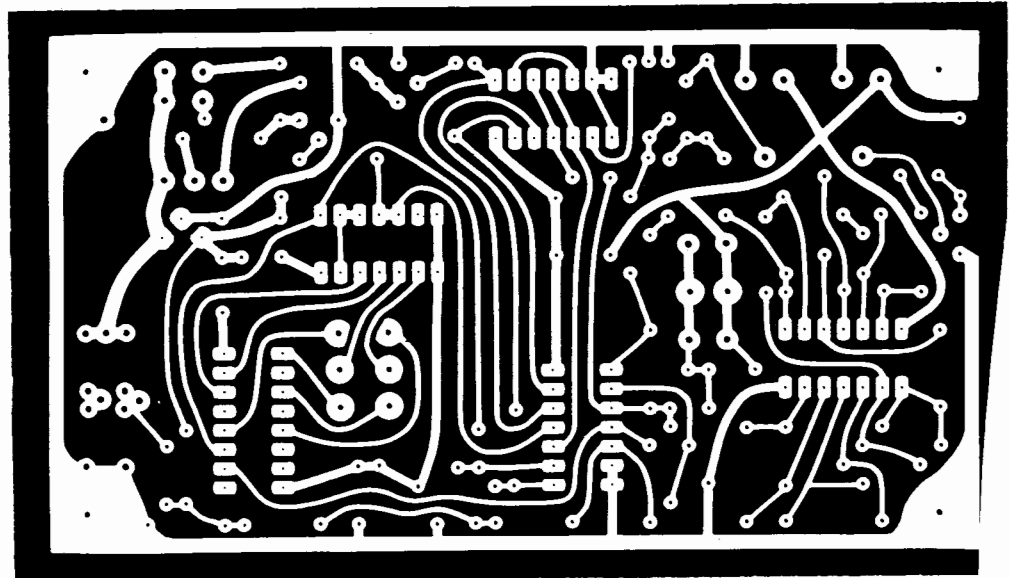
Full-size etching and drilling guide for the receiver pc board.
